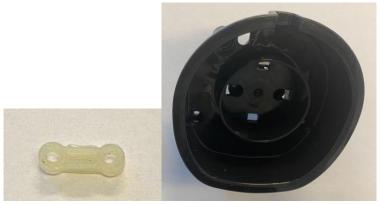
Cable Holder (left); Base Cap and Plastic Base (right)
